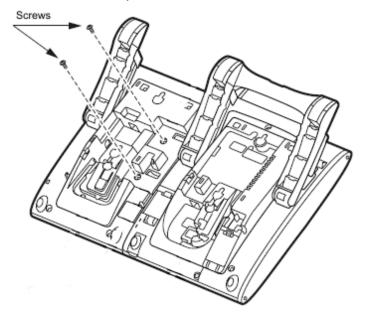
Securing the DCL-60-1 CONSOLE with Screws
